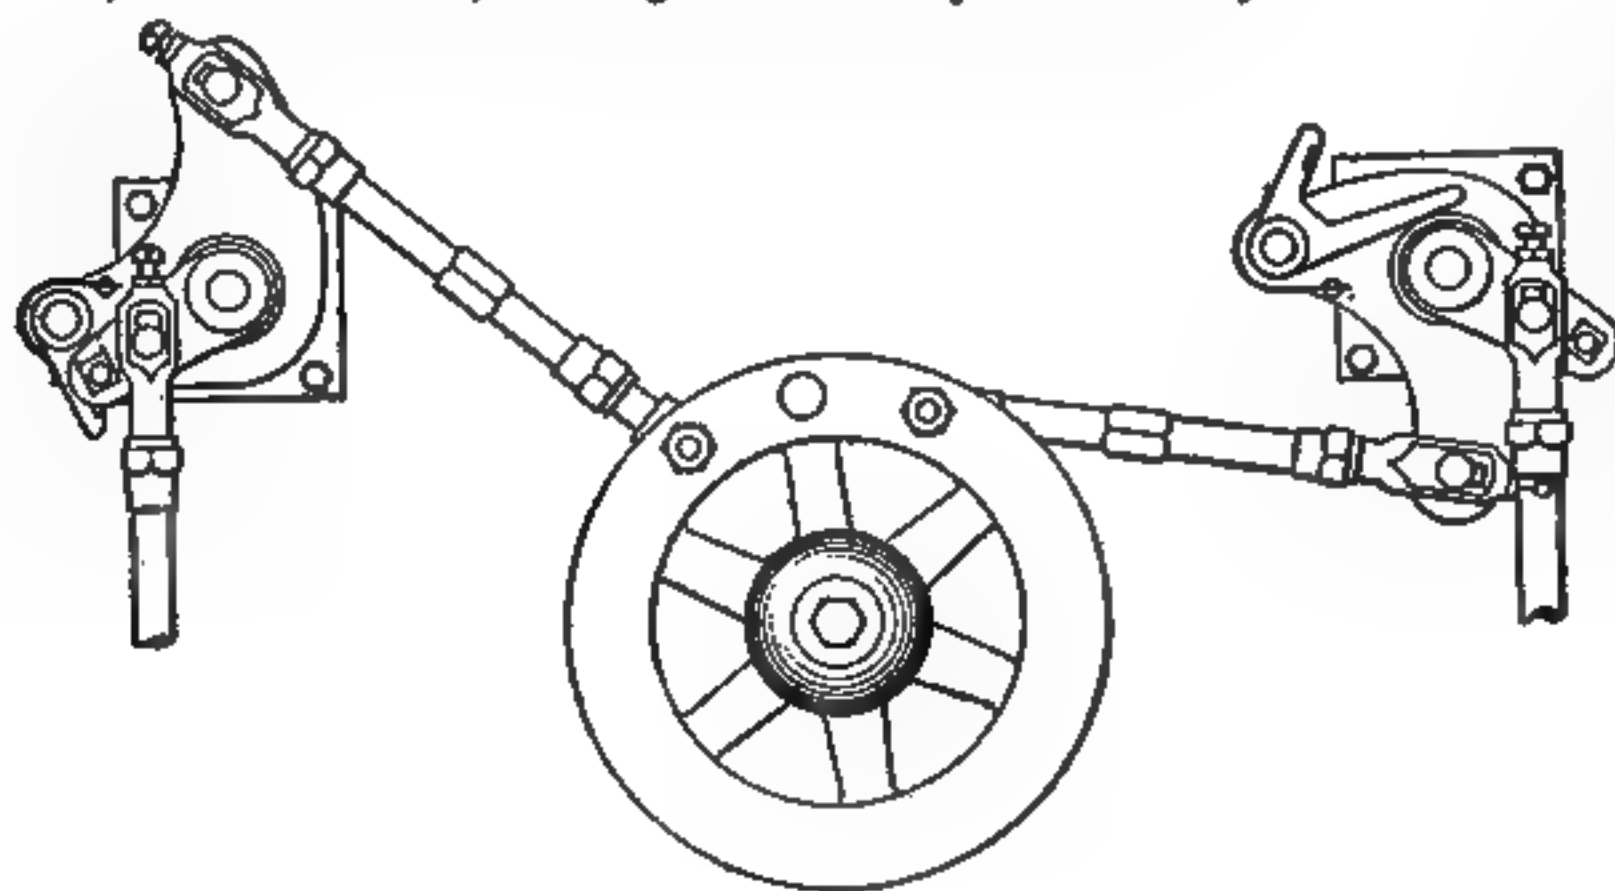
,042.—Peculiarities of the Corliss gear, showing steam valve mechanism turned over. This can happen if the wrist plate be turned too far in using the starting bar.
